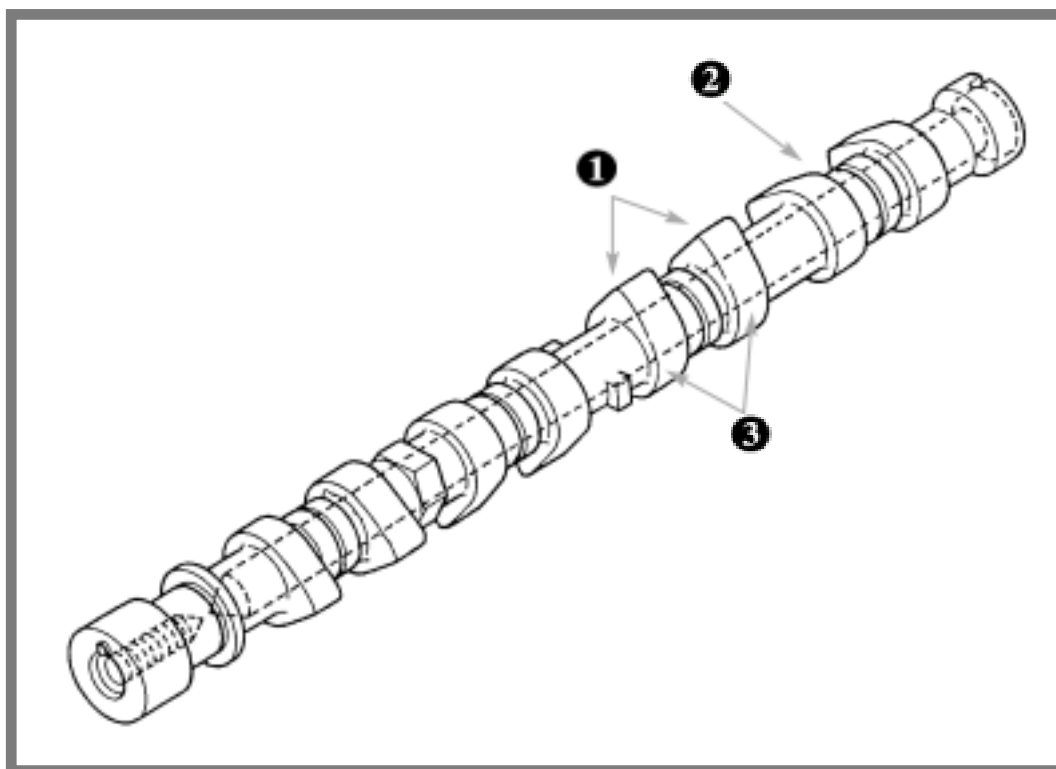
The camshaft rides directly on the cylinder head journal surface.
